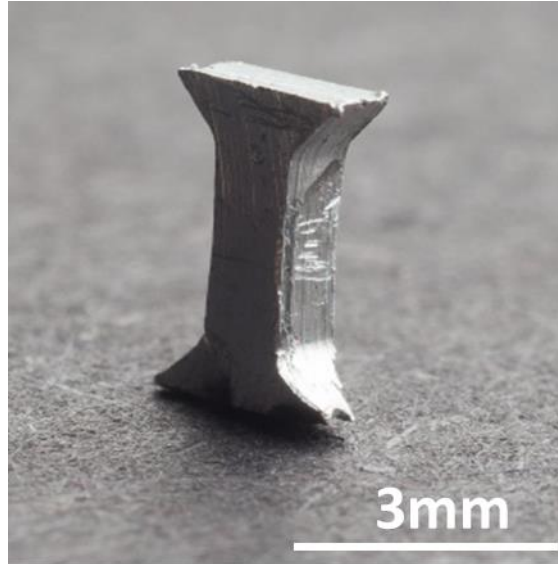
A “tensile-test” style specimen constructed using hybrid AMD-milling process.
